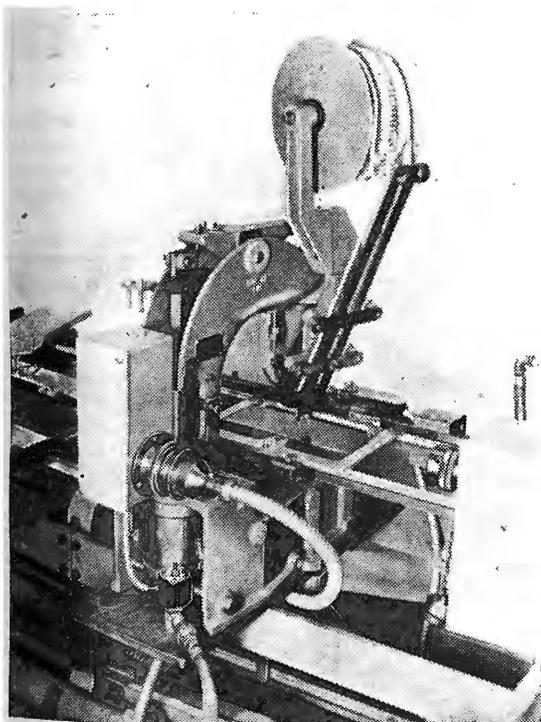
Rear view of an axial-lead component inserting machine about to place a component. The inserting head has been rotated to align the component leads to the pre-punched holes in the printed-wiring board.
